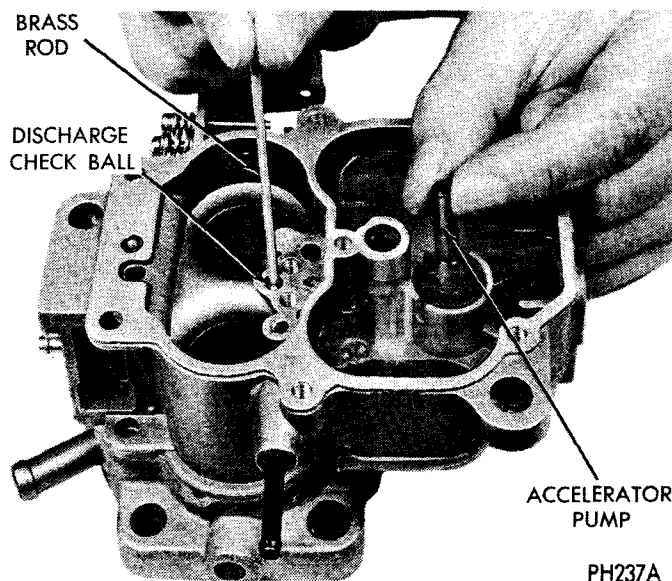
Testing Accelerator Pump Intake and Discharge Check Balls
